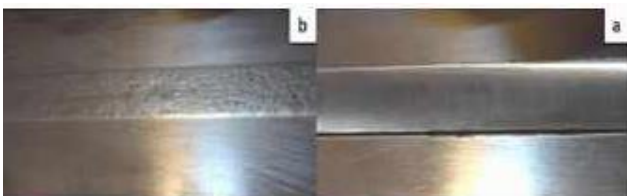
Friction stir welding of 5083 aluminum sheet. (a) Top surface of the weld, (b) Bottom surface of the weld
